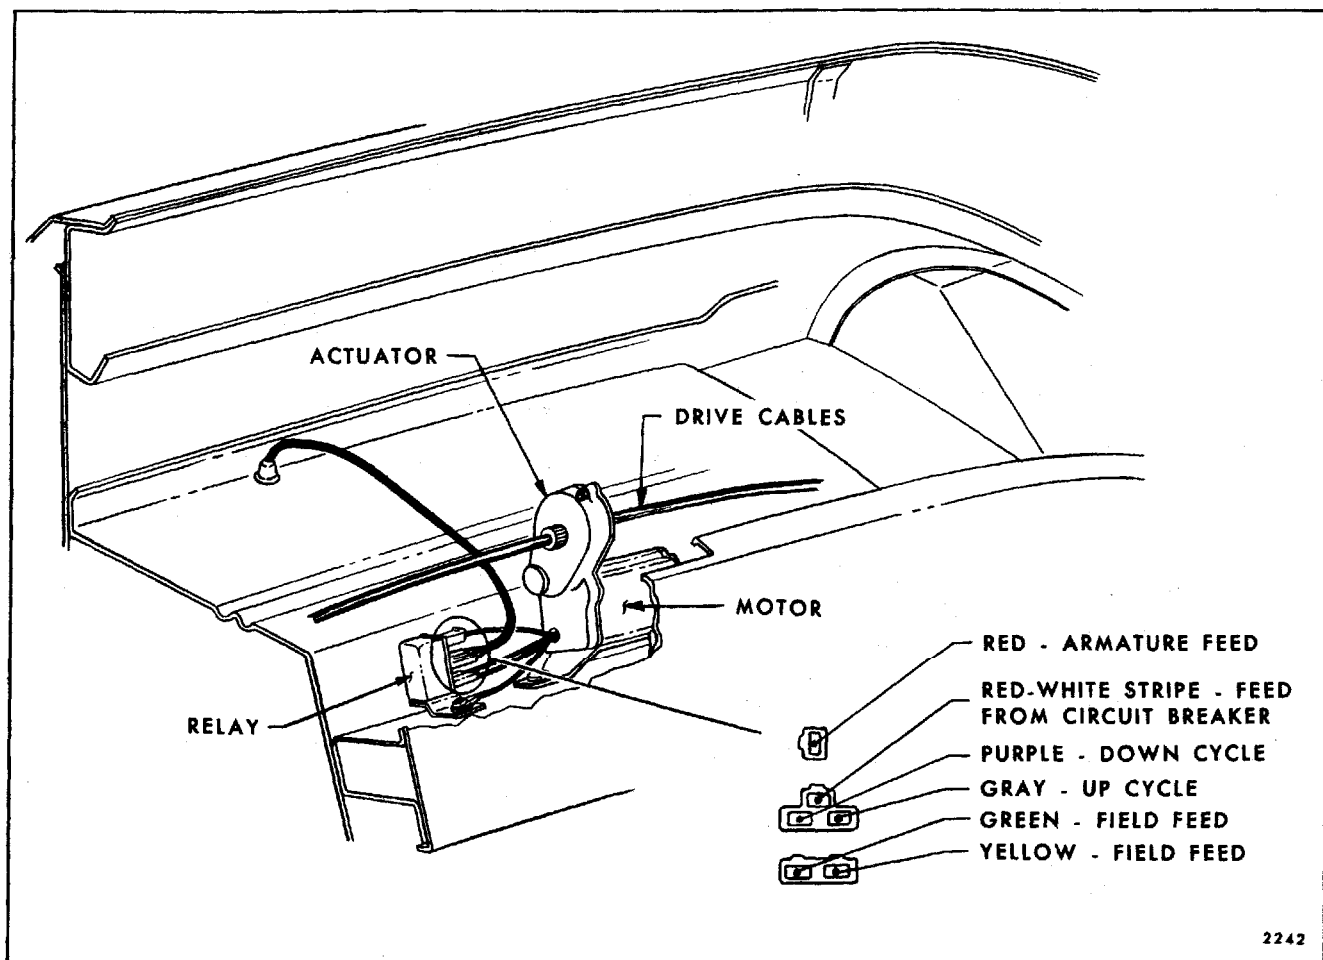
Electric Folding Top Motor and Actuator - Corvair
